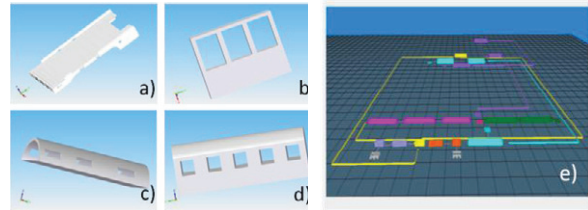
Modular train components: a) body module; b) body sides (6 components); c) imperial; d) case; e) Digital model of the layout configuration
